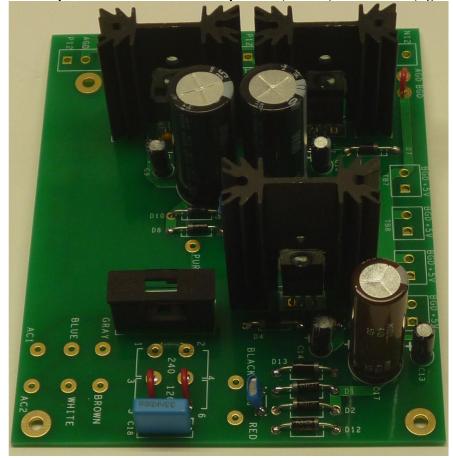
Power Supply before transformer is installed, wired for 120 Volts
